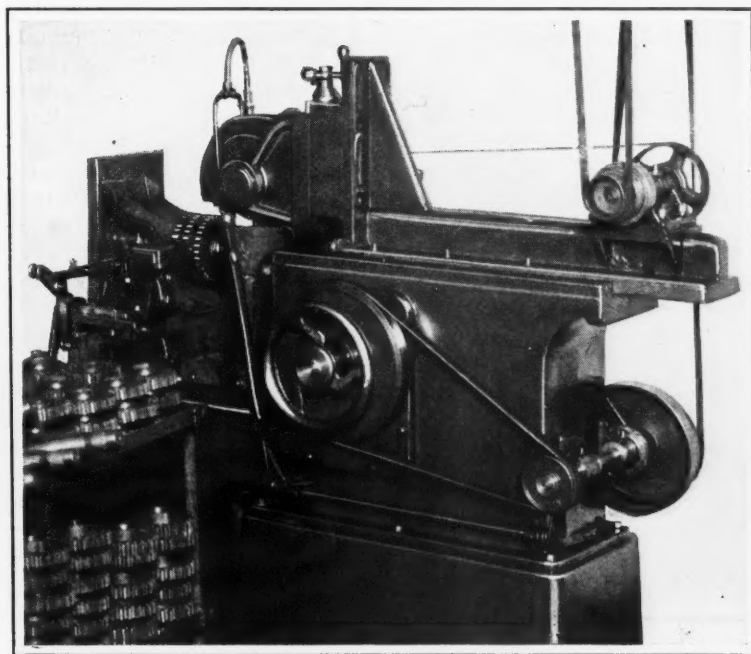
Gear Tooth Grinder equipped with Wheel of Rack-tooth Section
